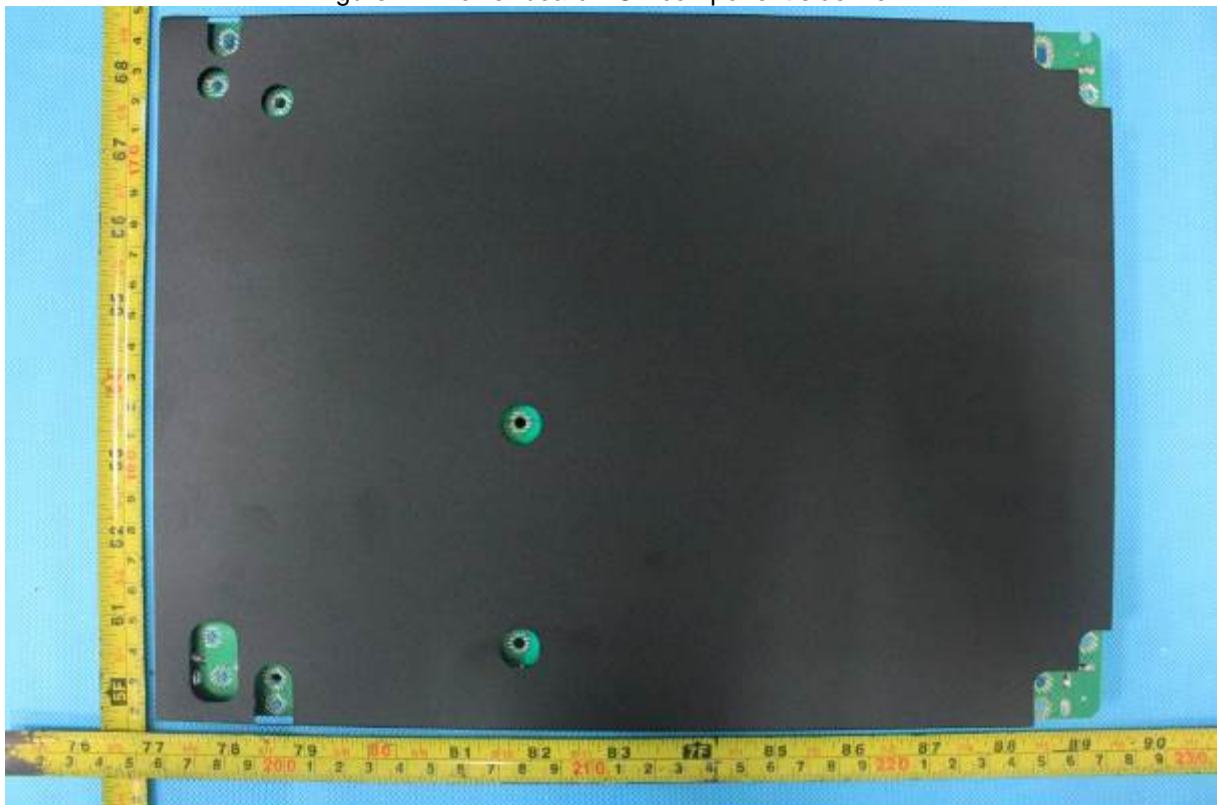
Power board PCB trace side view (covered by mylar sheet)
